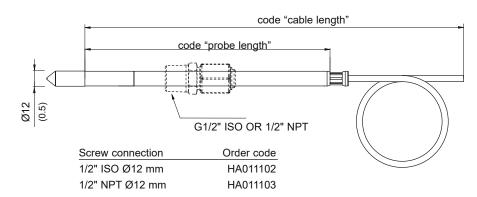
Type T7, pressure tight up to 20 bar (300 psi) for Td measurement with optional cut in fitting
